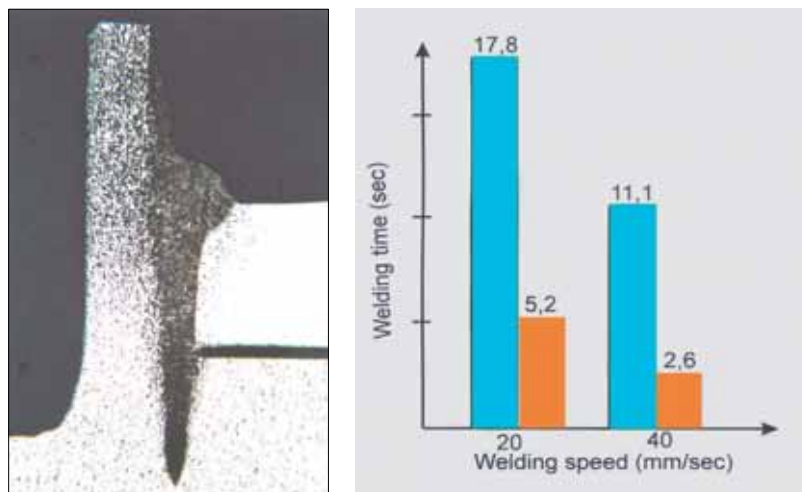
, 106: Series production of gears is being improved by multi beam technique: reduction of distortion by symmetric heat input and narrow welds; right: reduction of welding time by elimination of tack-weld and reduction of weld length for each beam.
